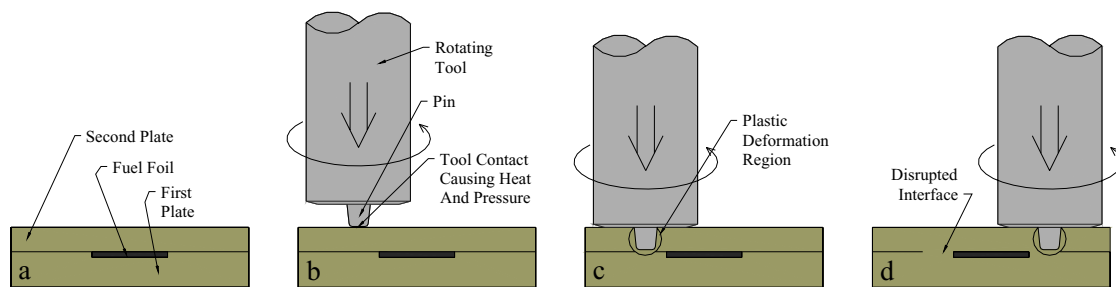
Friction stir welding schematic cutaway (vertical scale is exaggerated to show detail). a) Shows the plate assembly for FSW of monolithic plates. In b) the rotating pin contacts the surface of the plate causing heat and pressure. In c) the tool has been plunged into the surface of the material up to the shoulder of the tool. The rotating tool is stirring the metal in the plastic deformation region. In d) the tool has been dragged across the weld plane causing a disrupted interface and bonding to occur between the plates and between the cladding and the foil.
